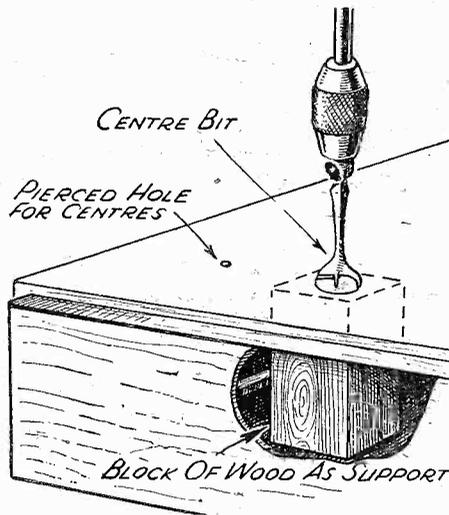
After making small centre holes from the inside of the cabinet full size holes should be traced out on the front, using a centre bit.
